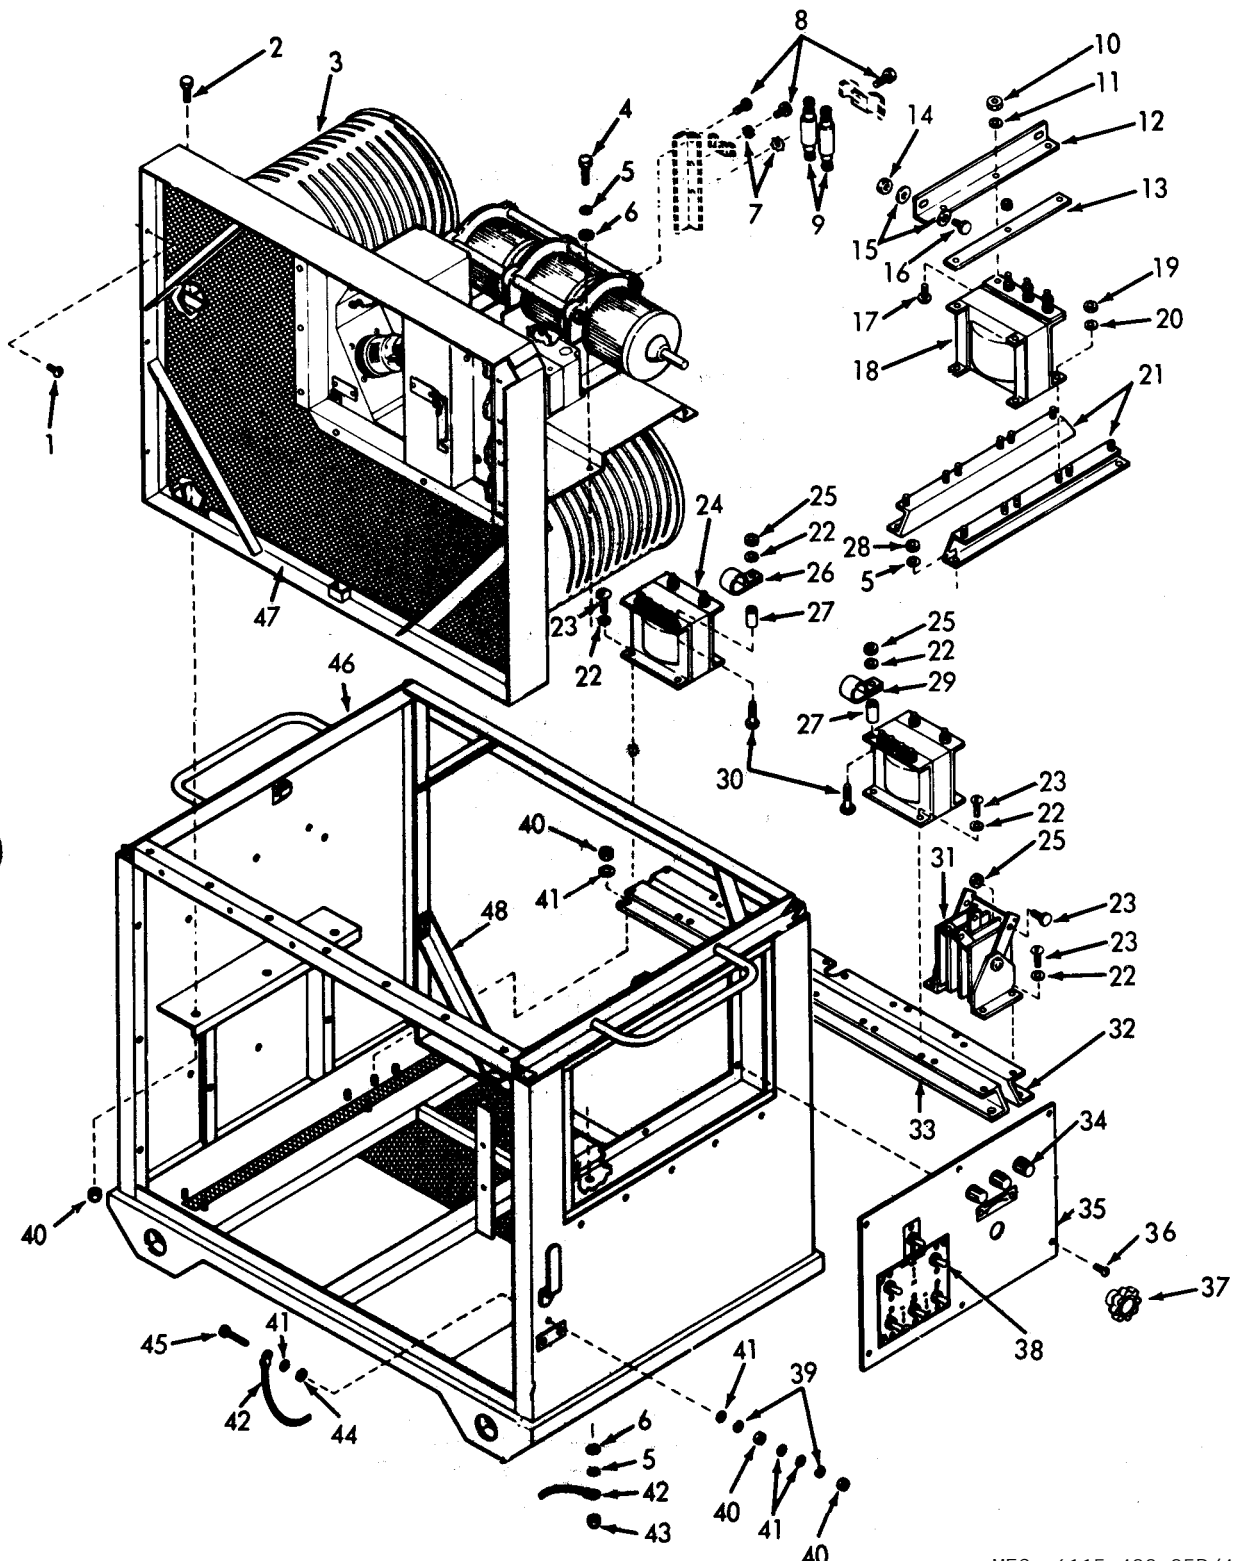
COMPONENTS, TRANSFORMERS AND RELATED PARTS
